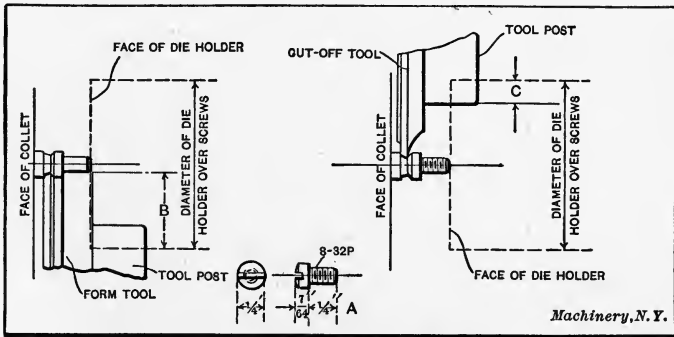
Diagram illustrating Method of Finding Clearance for Die-holder
